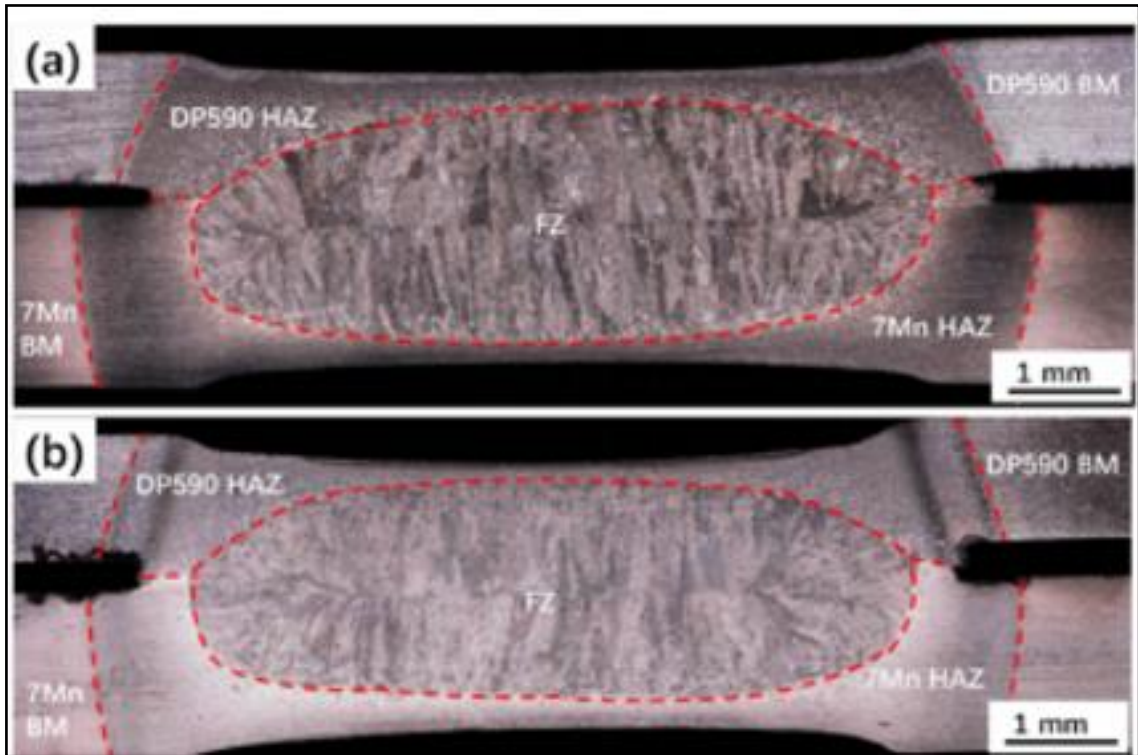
Cross section of resistance spot welding joints (a) single pulse (b) double pulse [19]
